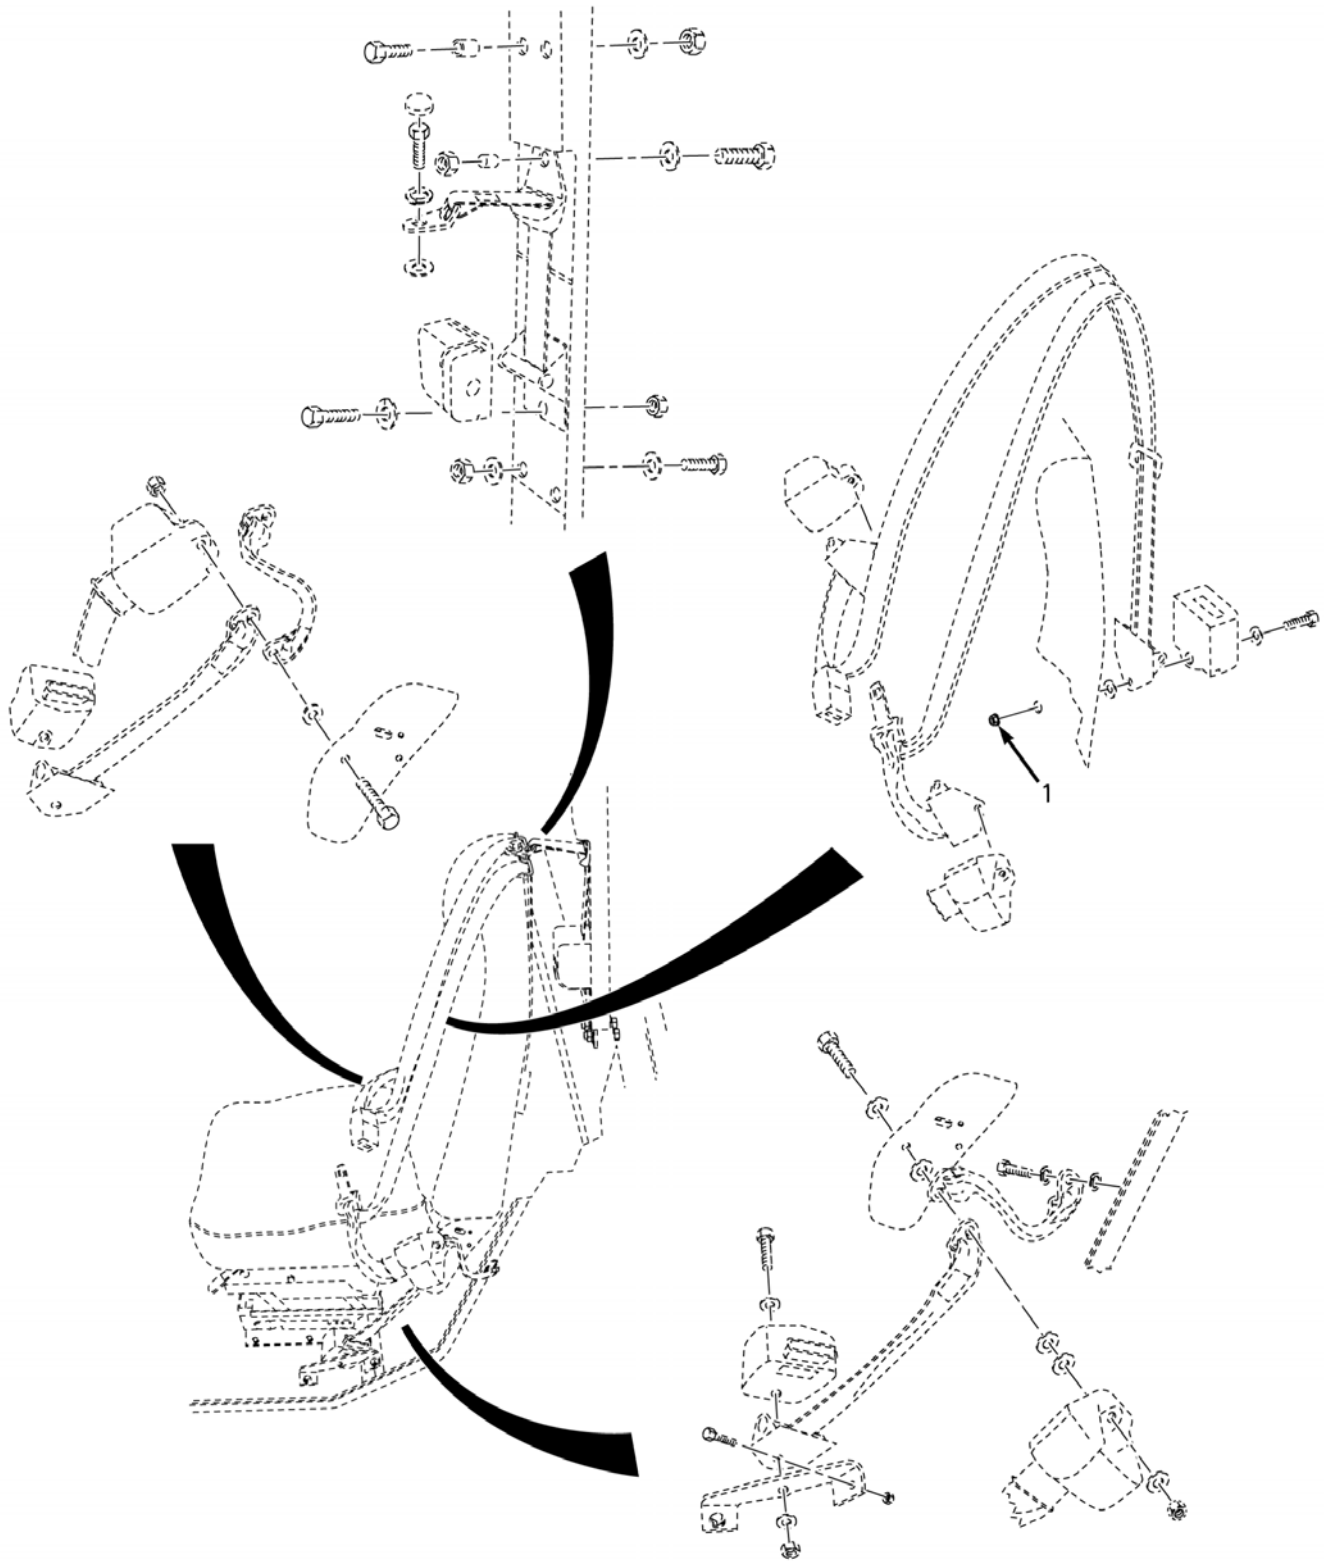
SEAT BELT ASSEMBLY (SHEET 1 OF 3)
